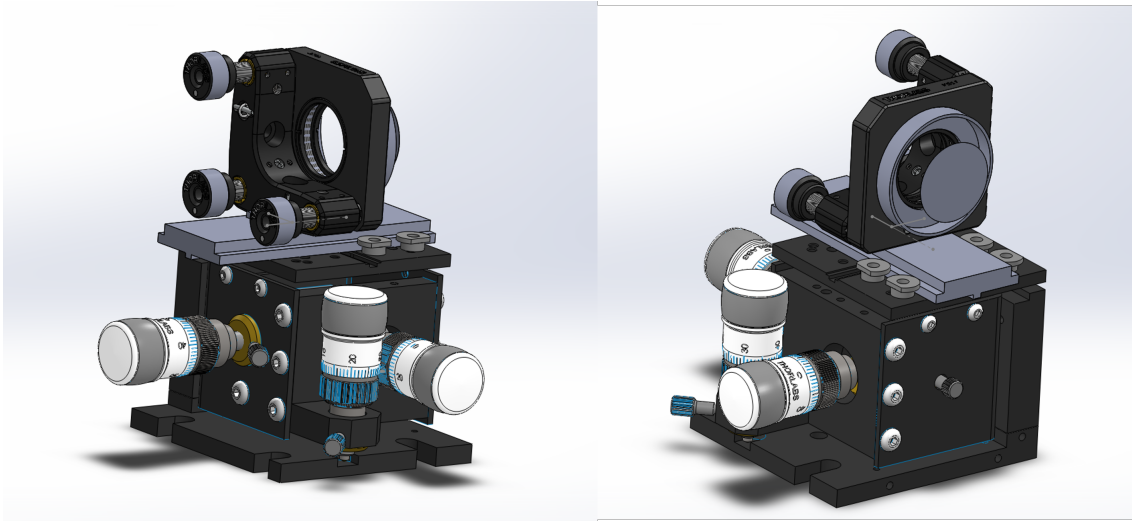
Lower tube lens module consisting of MicroBlock stage (MBT616D/M), mirror mount (KS1T) and custom-designed adapter. The same adapter as shown in figure 24 is used.
